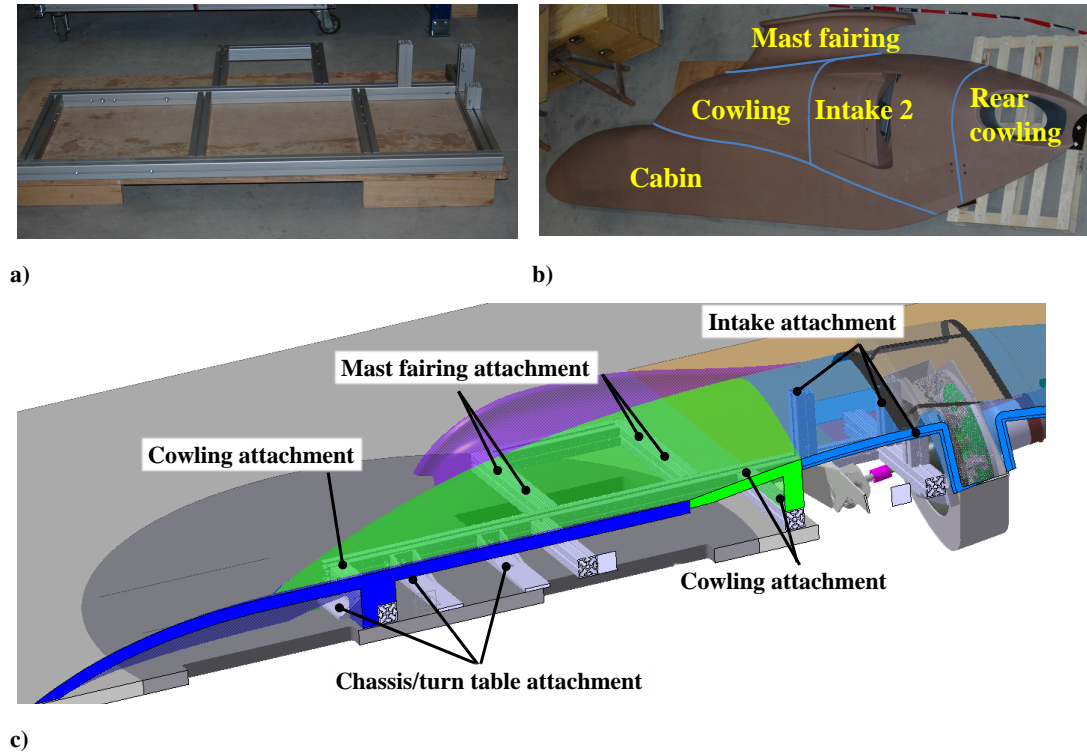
a) Chassis in side view, b) outer W/T model components and c) CAD display of chassis in W/T model, perspective longitudinal cut view.
